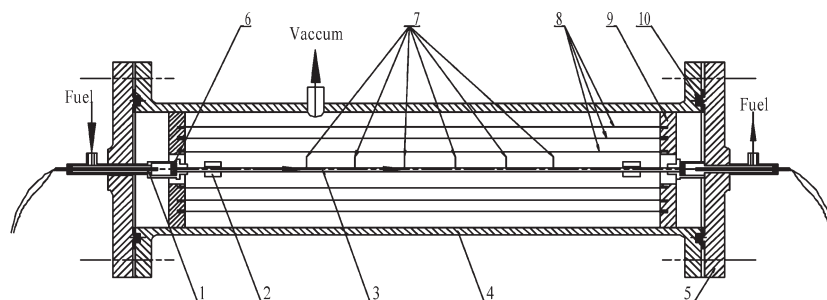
Schematic of the test section: 1, thermocouples; 2, electrical heating power connection; 3, test tube; 4, vacuum jacket; 5, flange; 6, filter net; 7, wall temperature thermocouples; 8, radiation shield; 9, shield fixer; 10, gasket.
